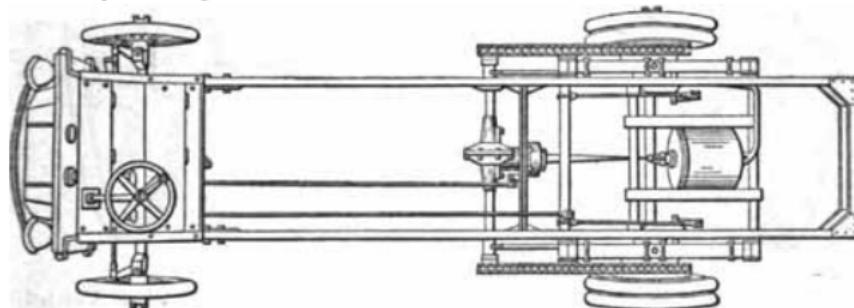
Top view of chassis showing drive assembly. (General Motors Company.)
